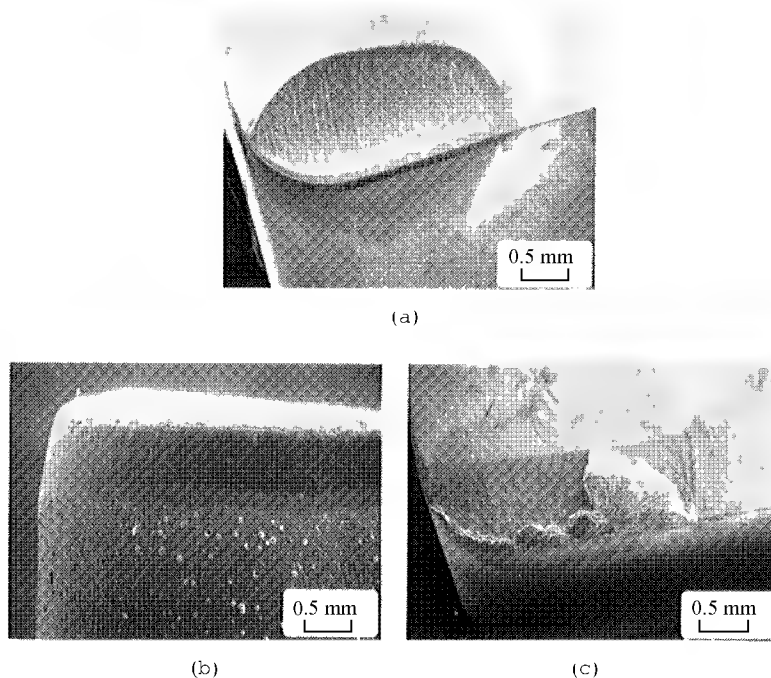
Tool wear mechanisms. (a) Crater wear on a cemented carbide tool produced during machining plain carbon steel. (b) Abrasive wear on the flank face of a cemented carbide tool produced during machining gray cast iron. (c) Built-up edge produced during low speed machining of a nickel-based alloy.
